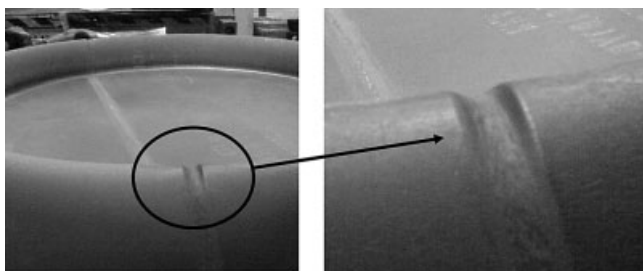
The Superplastic Forming test part (left) is a sub-scale pan formed into an airfoil shape. It built using titanium 6Al-4V standard grain size flat sheets, 2.5 mm thick, that had been fusion welded (TIG) together prior to forming. The close-up (right) clearly shows the lack of forming surrounding the welded region and the "orange peel" texture of the weld itself. There was one area of the weld that tore. TIG welding was abandoned after several of these tests failed.
